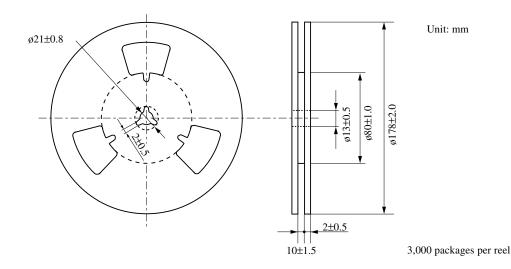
Embossed Taping Reel Dimensions for Mini Type Package
